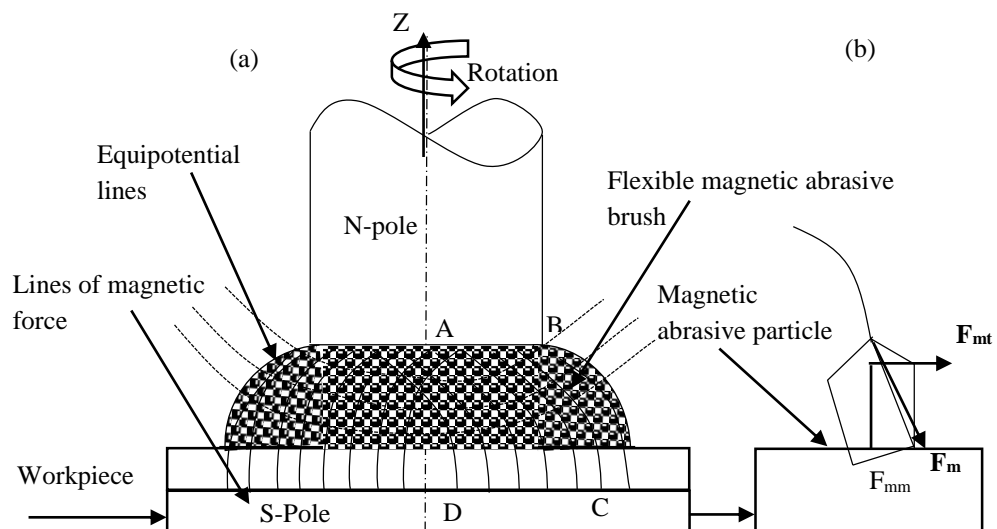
(a) Flat magnetic abrasive finishing, (b) Magnified view of finishing area, workpiece and electromagnetic coil [13]
